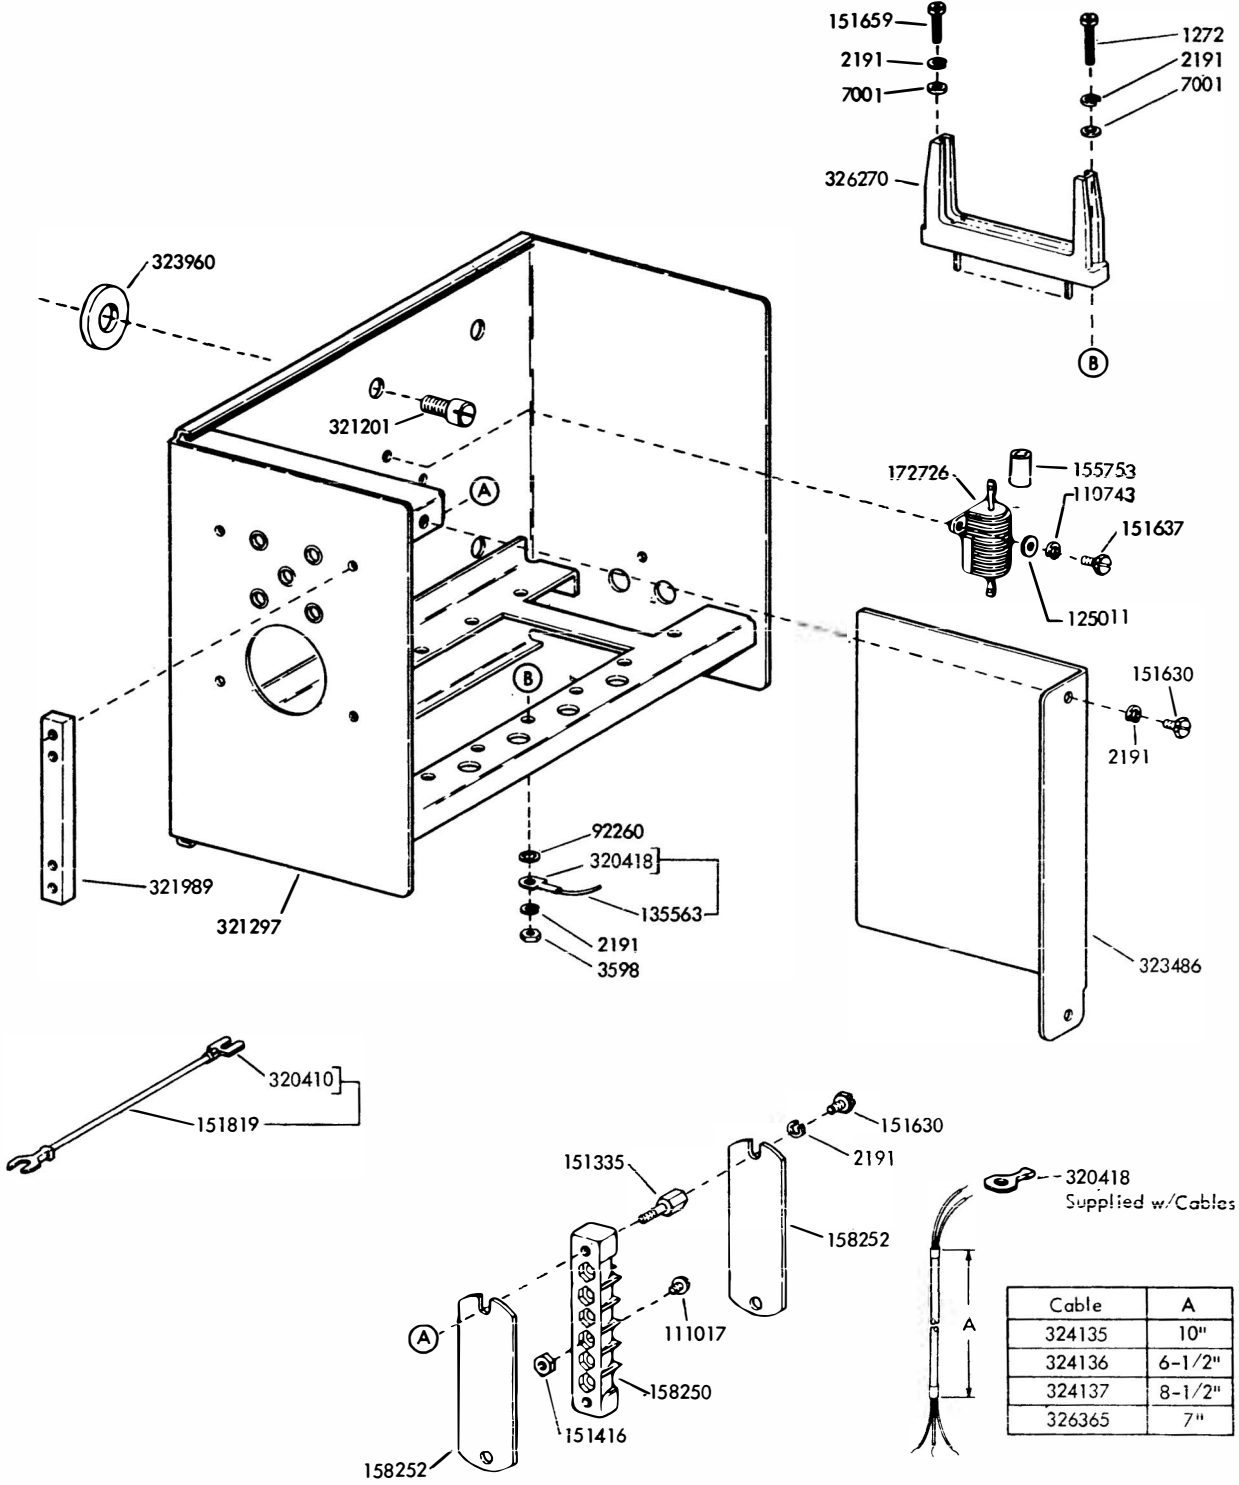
322820 ELECTRICAL SERVICE ASSEMBLY (Continued)
